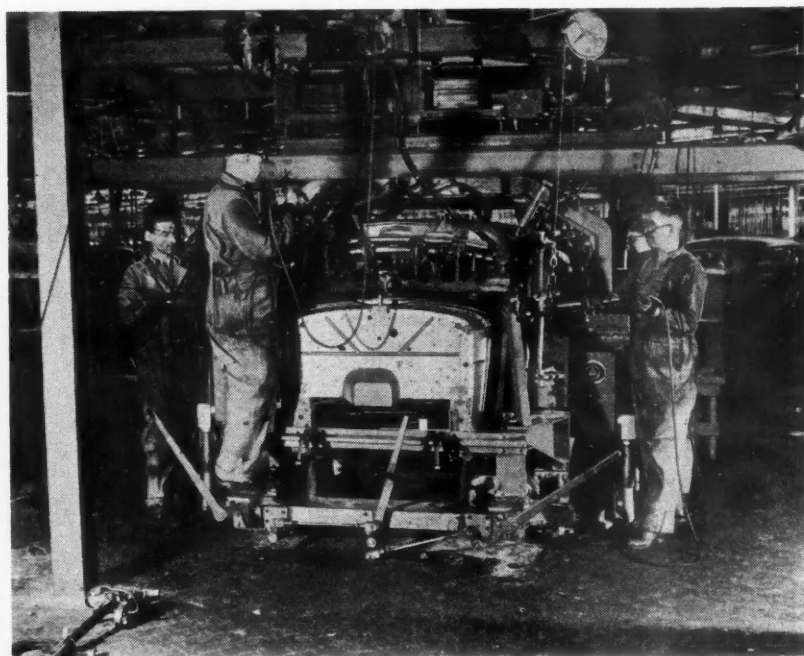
Master welding buck, one of a battery of four machines, completing the welding of the entire structure. It is an excellent example of a modern bar welder, using water-cooled tools.
